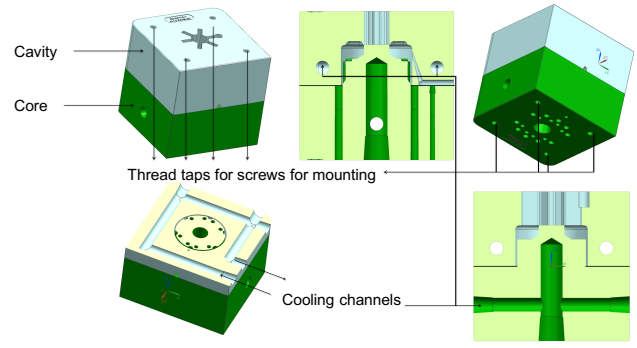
The geometry of the original injection mold. Source: Hewitt Molding Company
